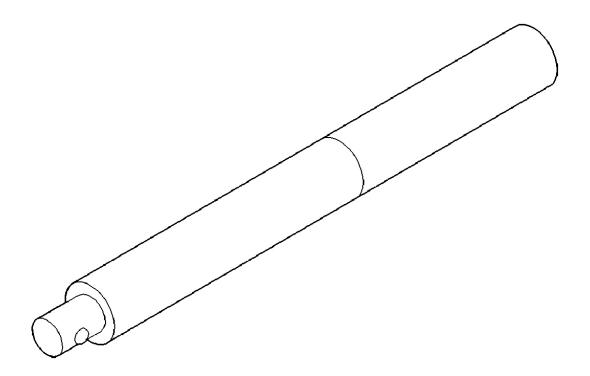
Installer Caliper Dust Boot 8280 Courtesy of CHRYSLER LLC
